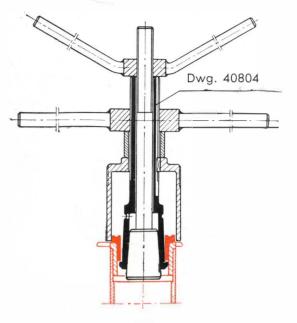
Detailed drawing showing the ball bearing seat puller.
